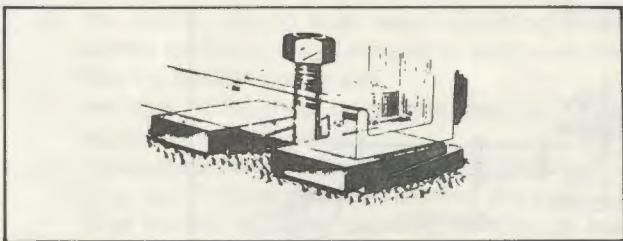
ADJUSTING WEDGES FOR MOUNTING
